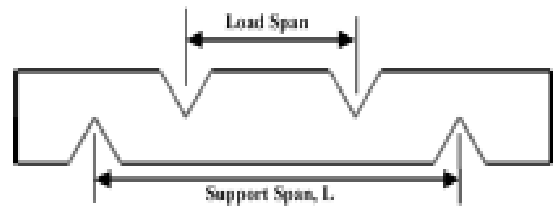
Fixture Used to Align Loading Noses and Supports
